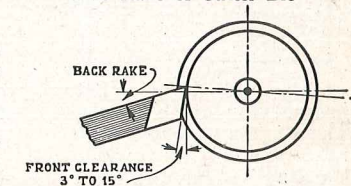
Correct Front Clearance and Back Rake of Cutter Bit
